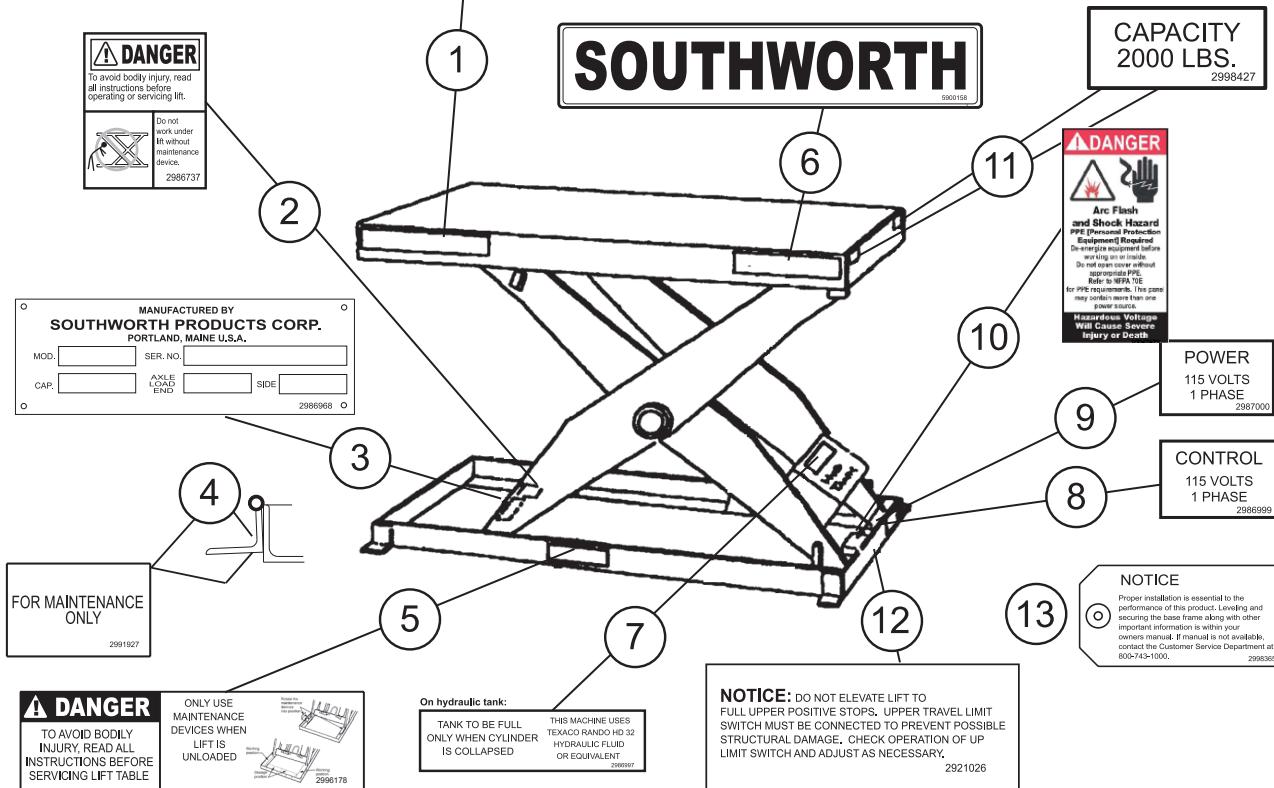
Labels and Precautionary Markings (straight skirt and bevel toe guard platforms)
